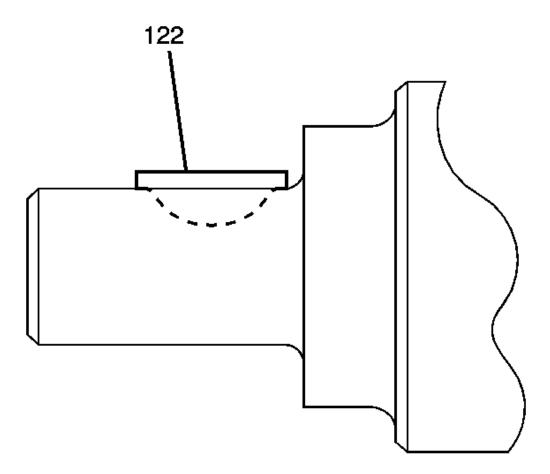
View Of Installed Crankshaft Key Courtesy of GENERAL MOTORS CORP.
